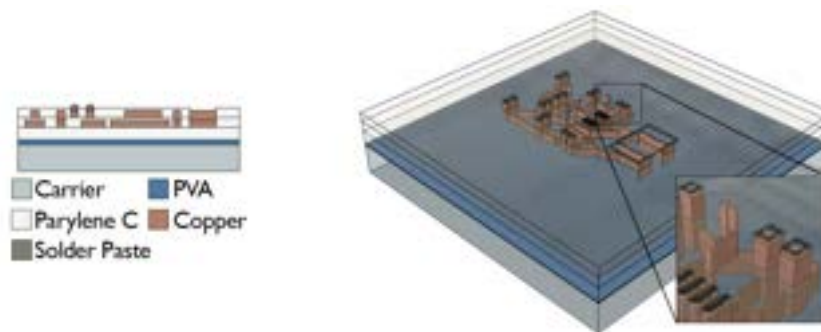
Solder paste deposition on the parylene areas opened by dry etching.
